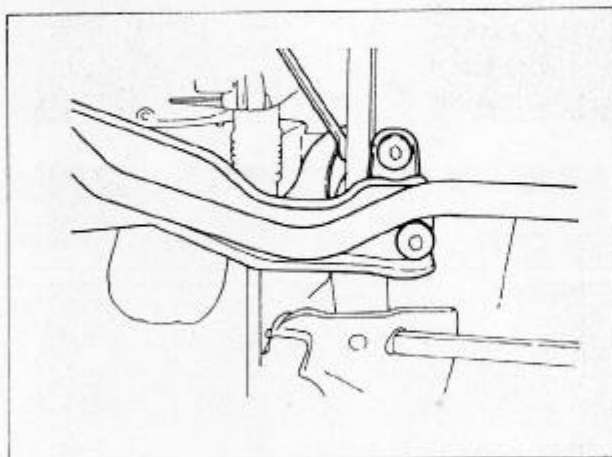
A — 95 TRANSMISSION REAR MOUNT
